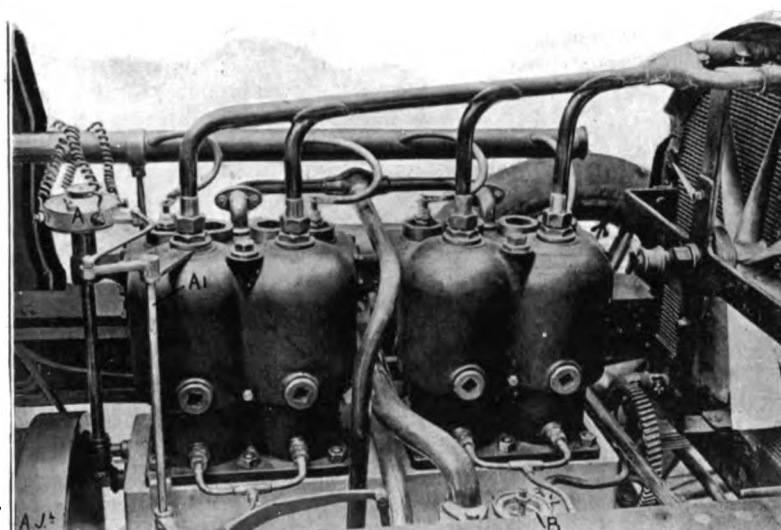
View of the 16-20-h.p. Cupelle Engine, showing the automatic valve, B, on the carburettor, and the position of the gear-driven commutator, A, with its timing-rod, A¹.
